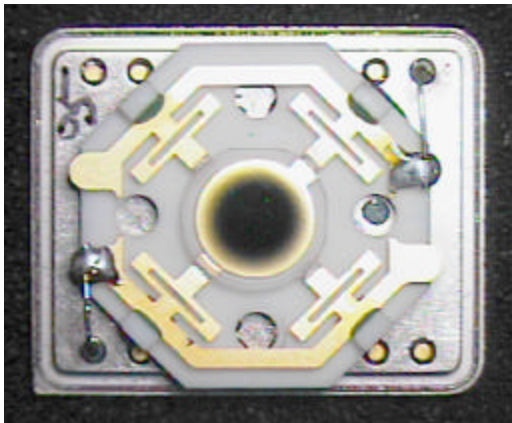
(8mm) Resistance Weld QRM Structure (flats).
